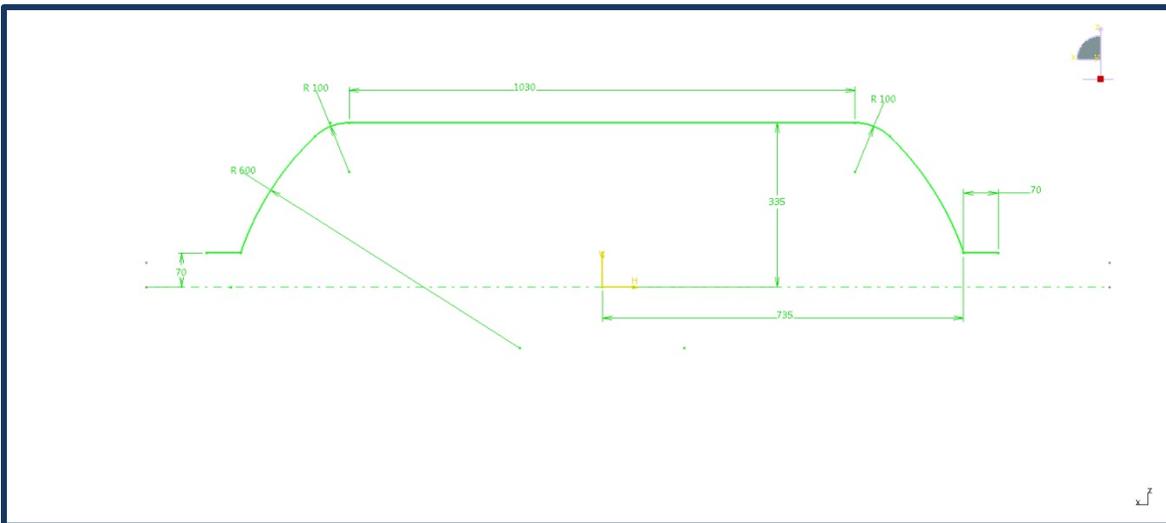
Drawing Specifications for the Cylindrical Pressure Vessel.
